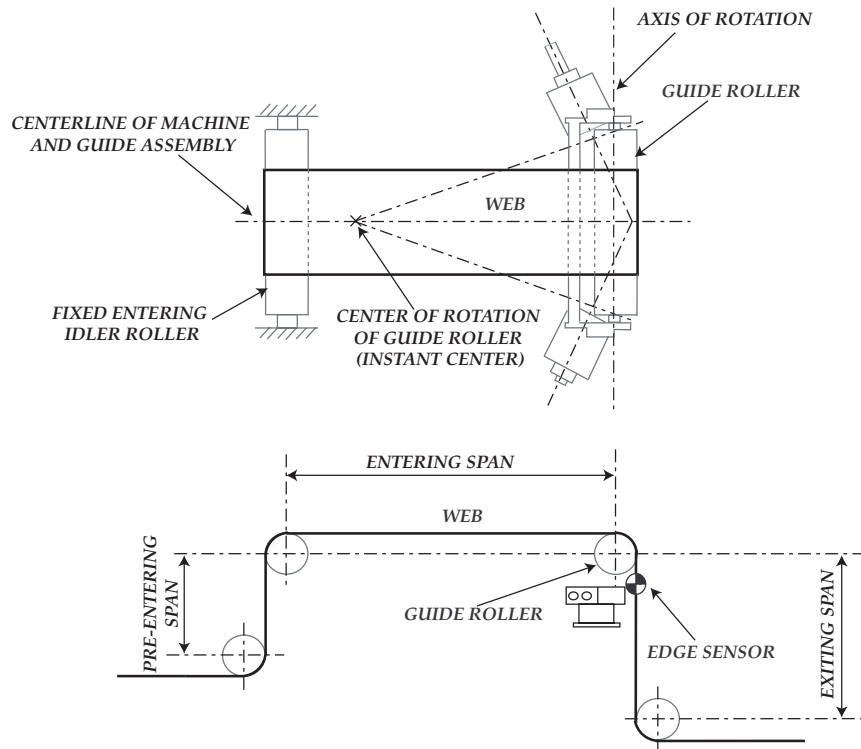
Remotely Pivoted Guide or Steering Guide
